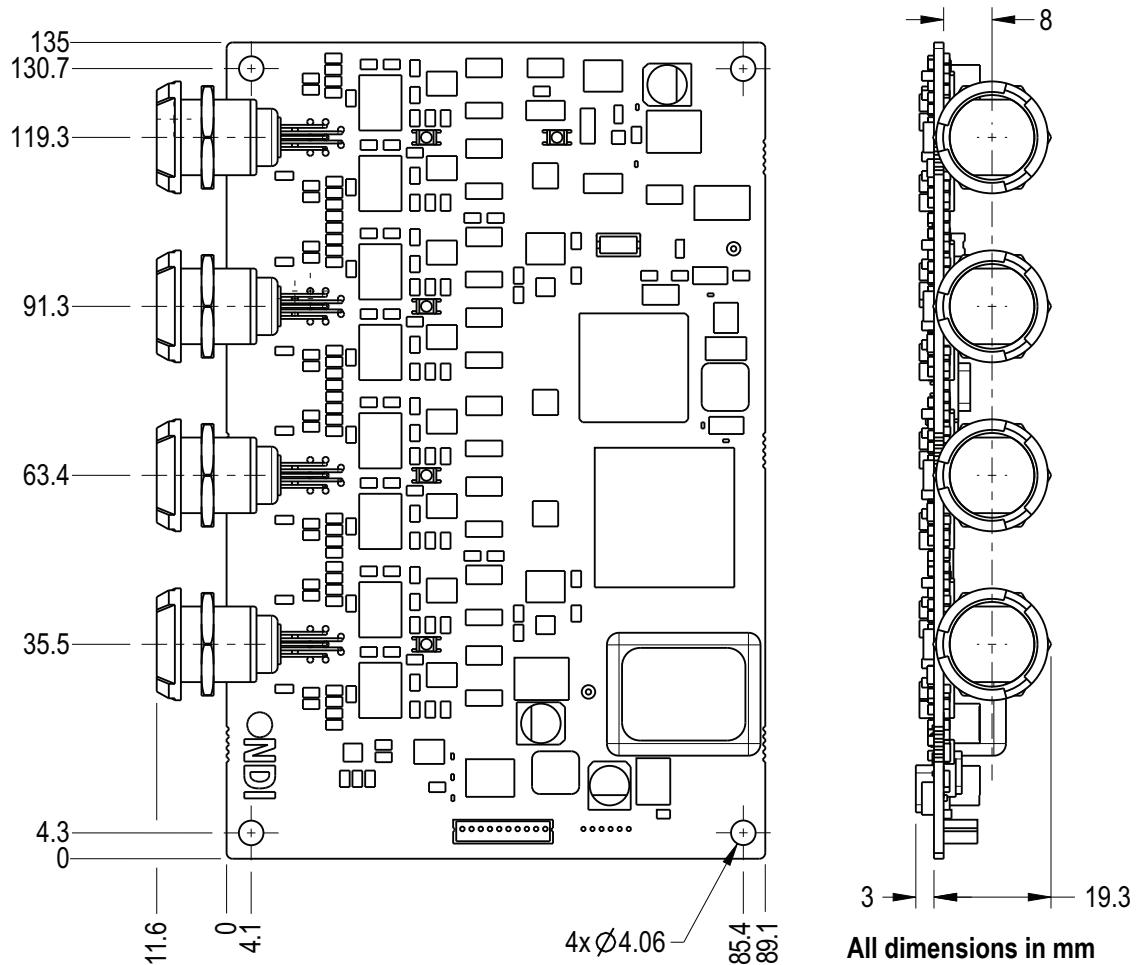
SIU Board Dimensions - With Odu Connectors
